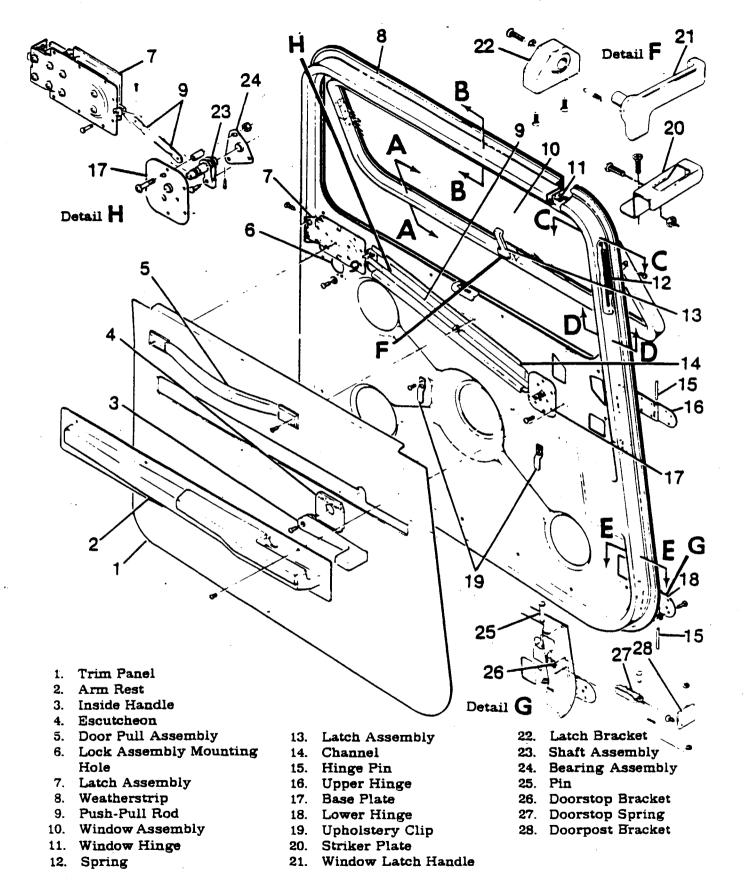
Left Cabin Door Assembly (Sheet 1 of 2)
